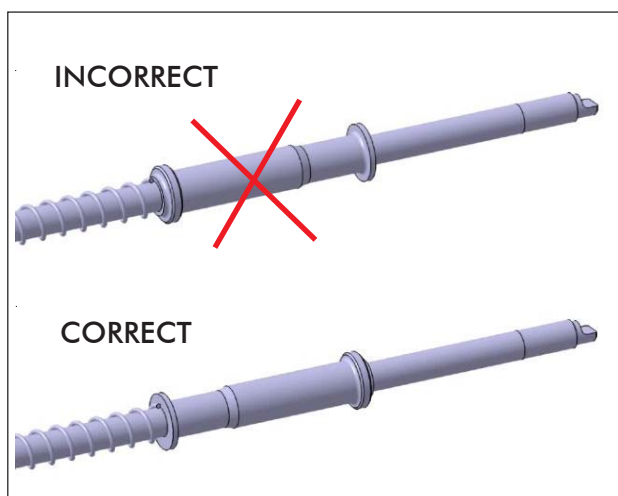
m - Way to reassemble the spring, return, housing, rear
